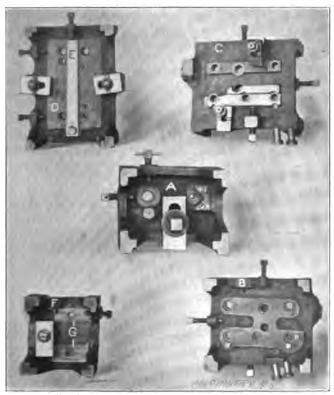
Miscellaneous Examples of Open Drill Jigs
